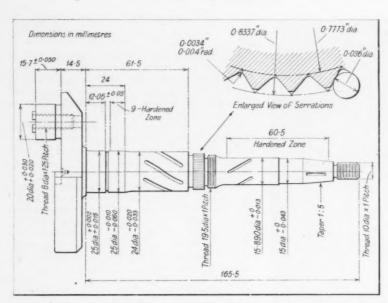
A View of the Crankshaft, Showing the Principal Dimensions
